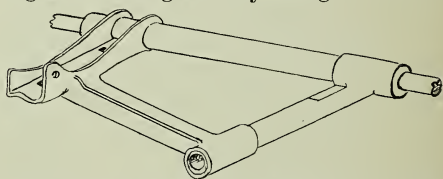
By using the old bolt-holes and bracing to frame of casting, an absolutely true and rigid set of bearings can be obtained.
